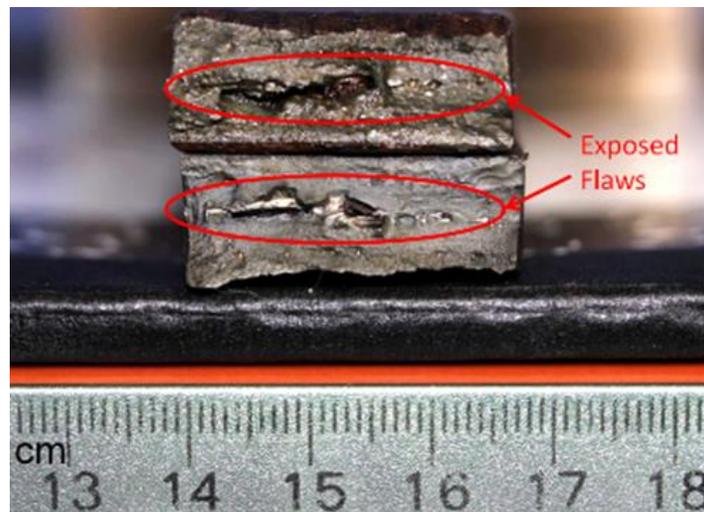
Exposed flaws at the fracture surface of a girth weld after a cross-weld tensile test
